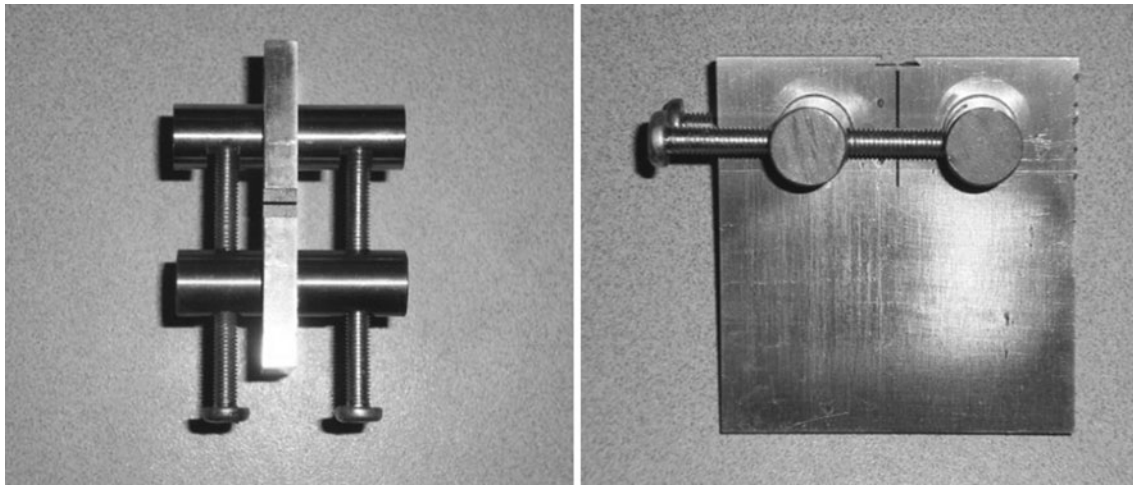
Compact tension specimen with load jig installed to provide constant crack opening displacement
